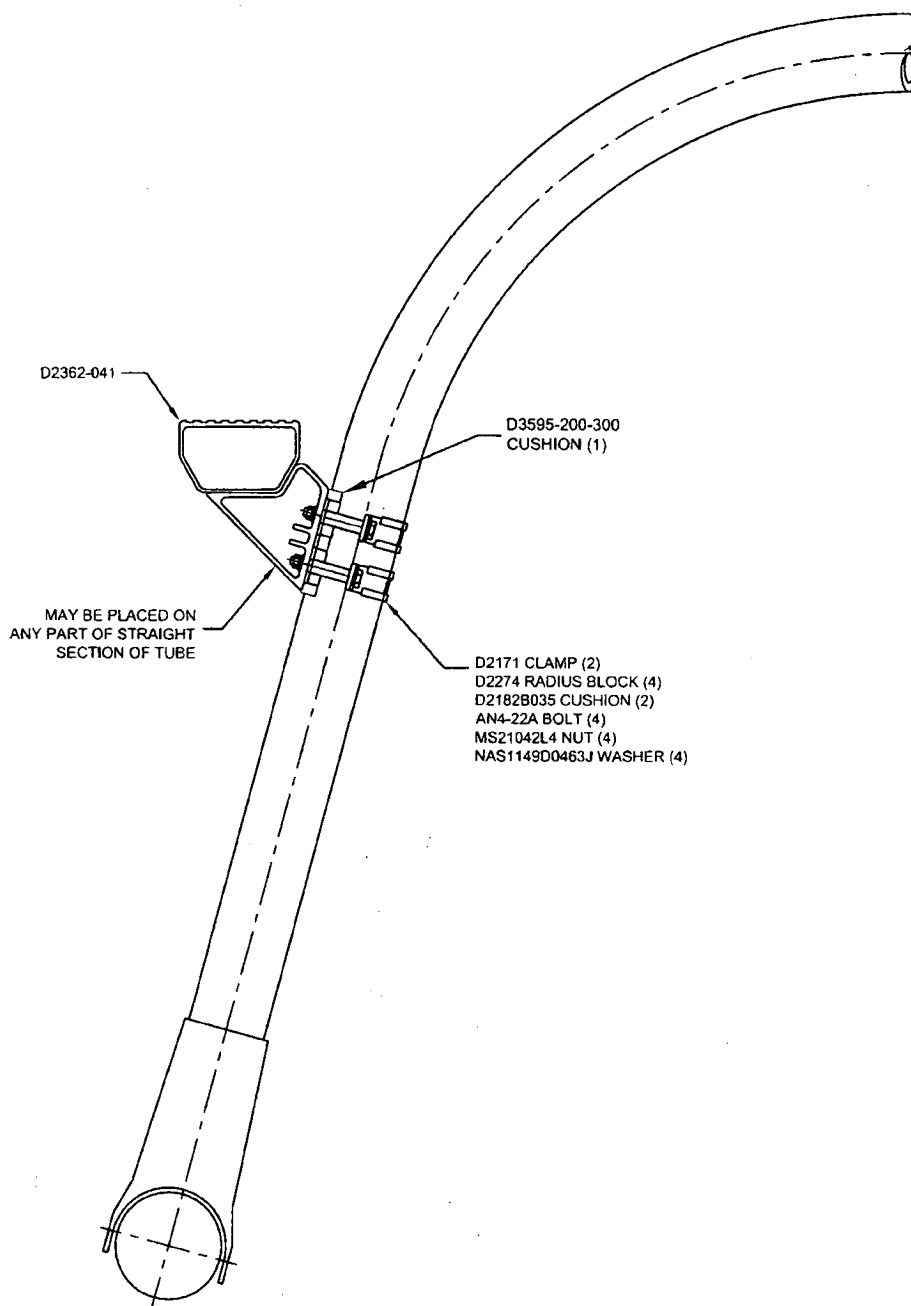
D350-591-117A Heli-Access-Step™, Pre-Flight Step
